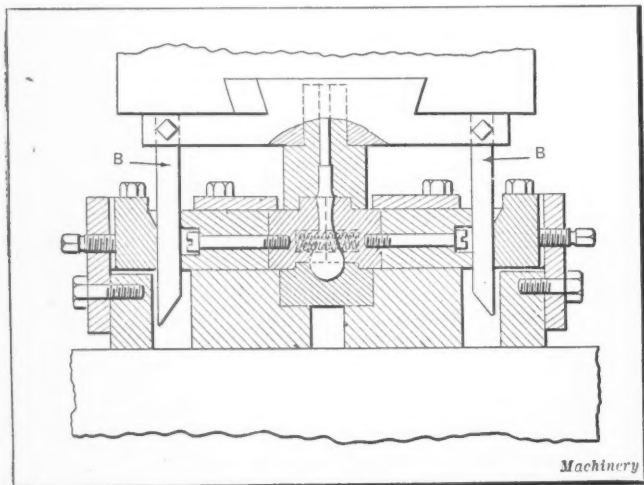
Cross-sectional View of Dies used in the Final Upsetting
